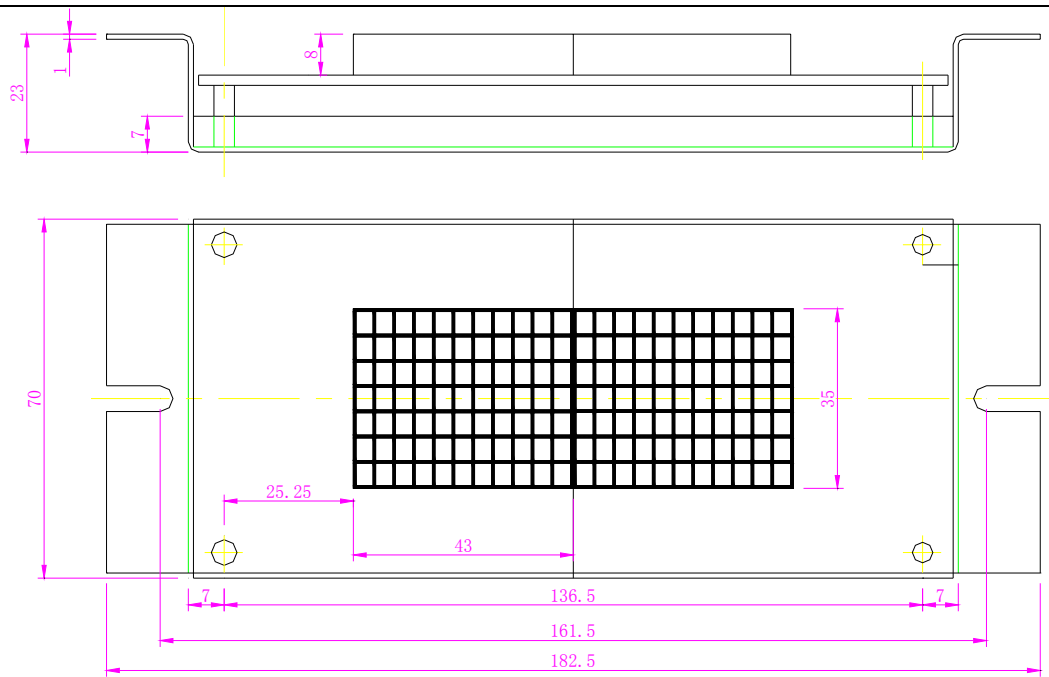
Mounting Dimensions of SM-04-HSC
